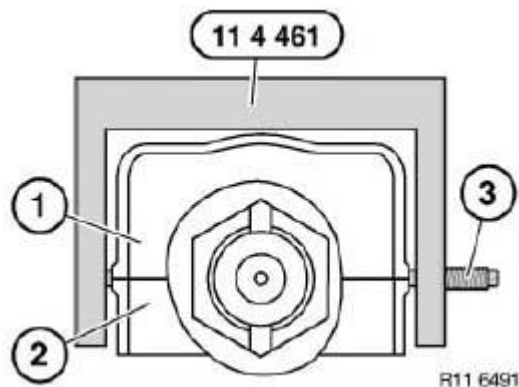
Identifying Special Tool (11 4 461), Lower Bearing Bank And Upper Bearing Bank
